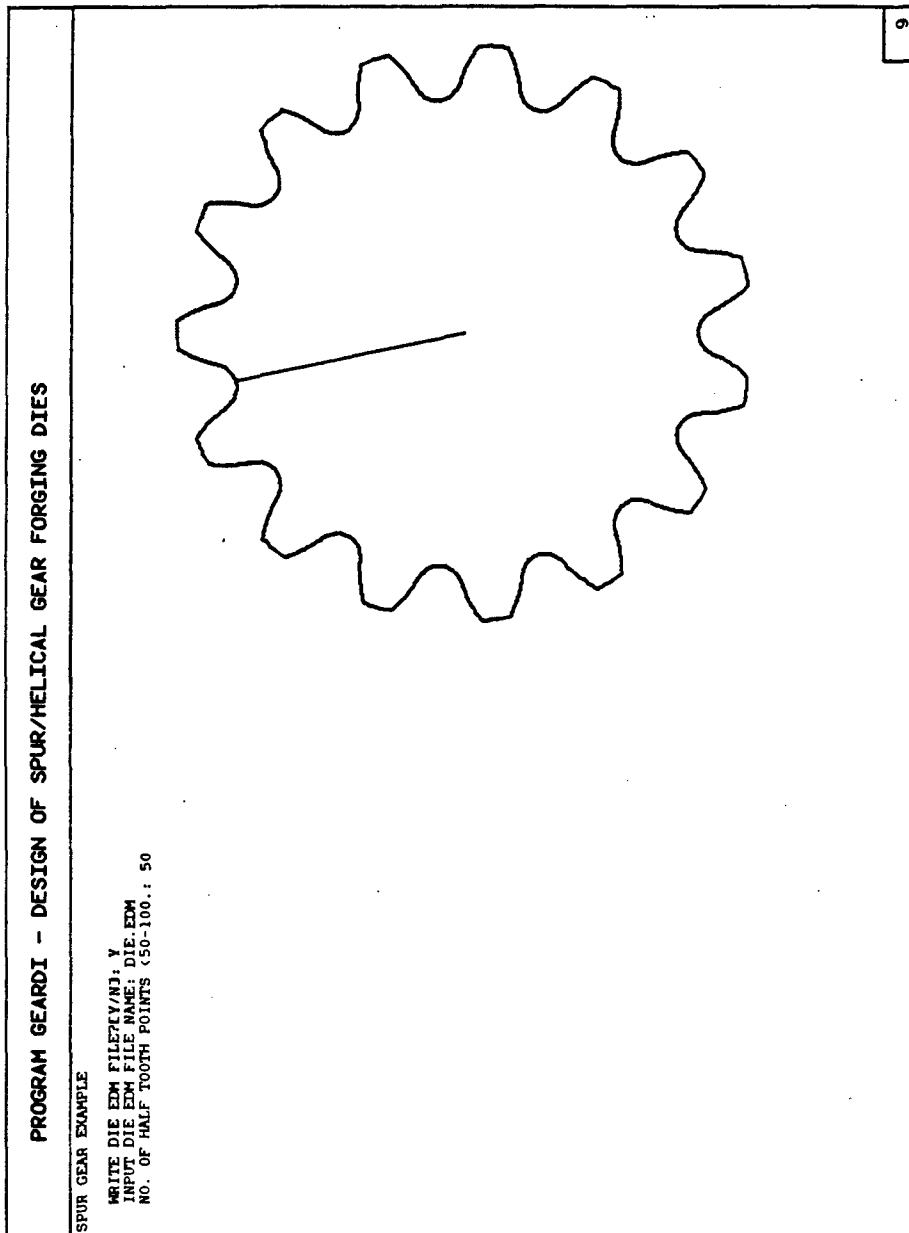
Spur Gear Example; Path of Wire EDM of Forging Die
